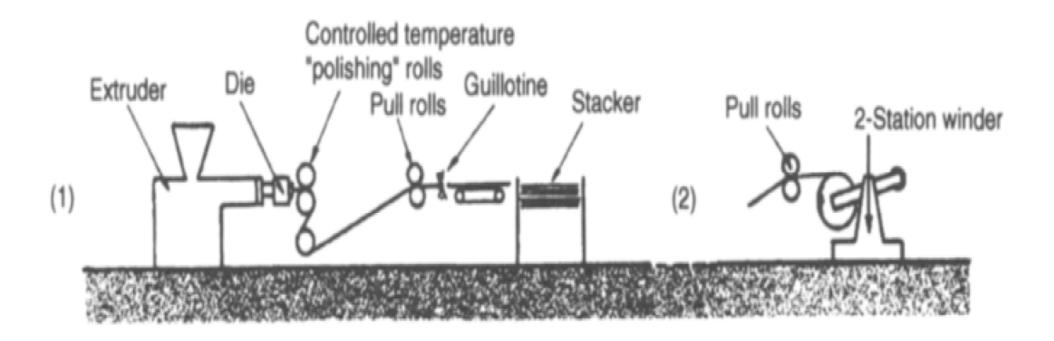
(a) Sheet extrusion (1) thick sheet (2) thin sheet
